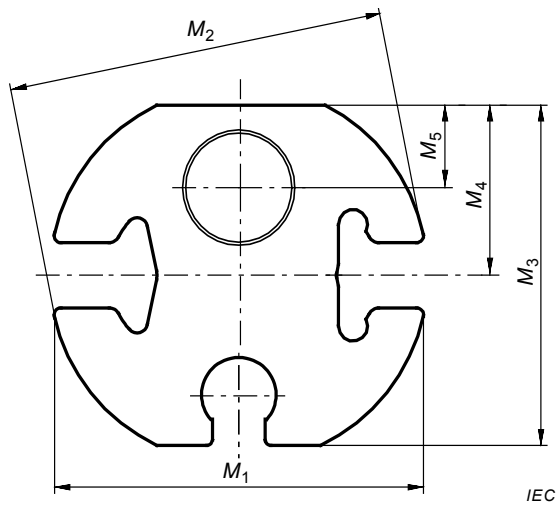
Dimensions of gauges for ball coupling size 16N and 18N
